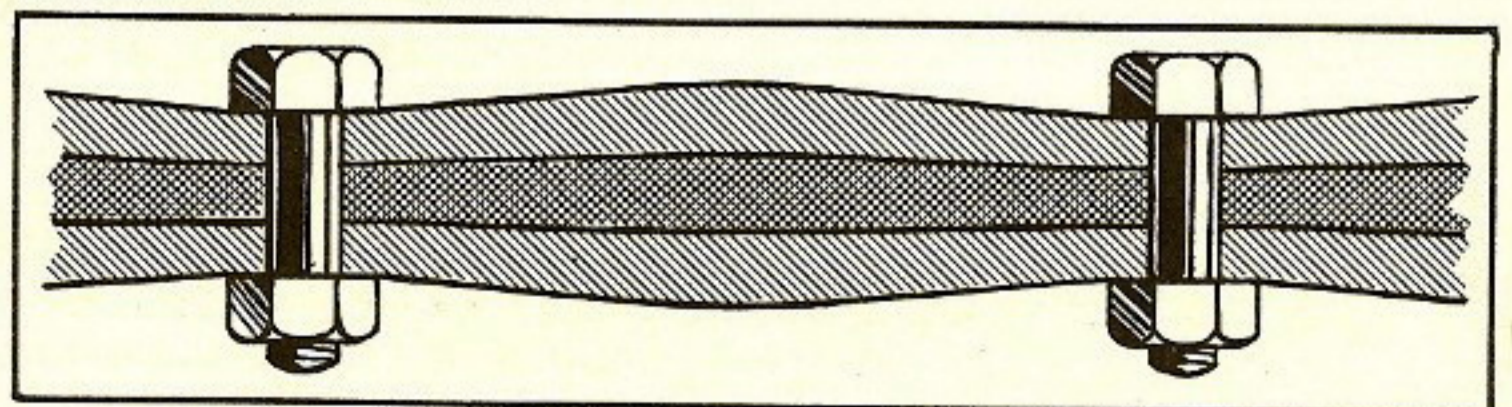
Too-tight nuts and bolts look like this—too much squeeze ruined the plates.
